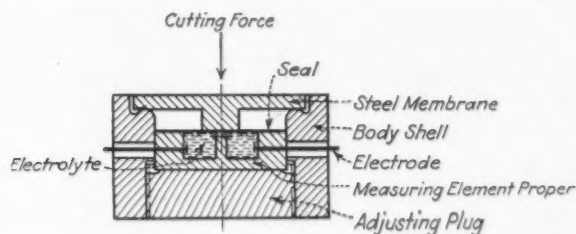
Sectional view of a new German instrument for determining the cutting pressure of a machine tool. This device can also be used for protecting a machine from overloading.
